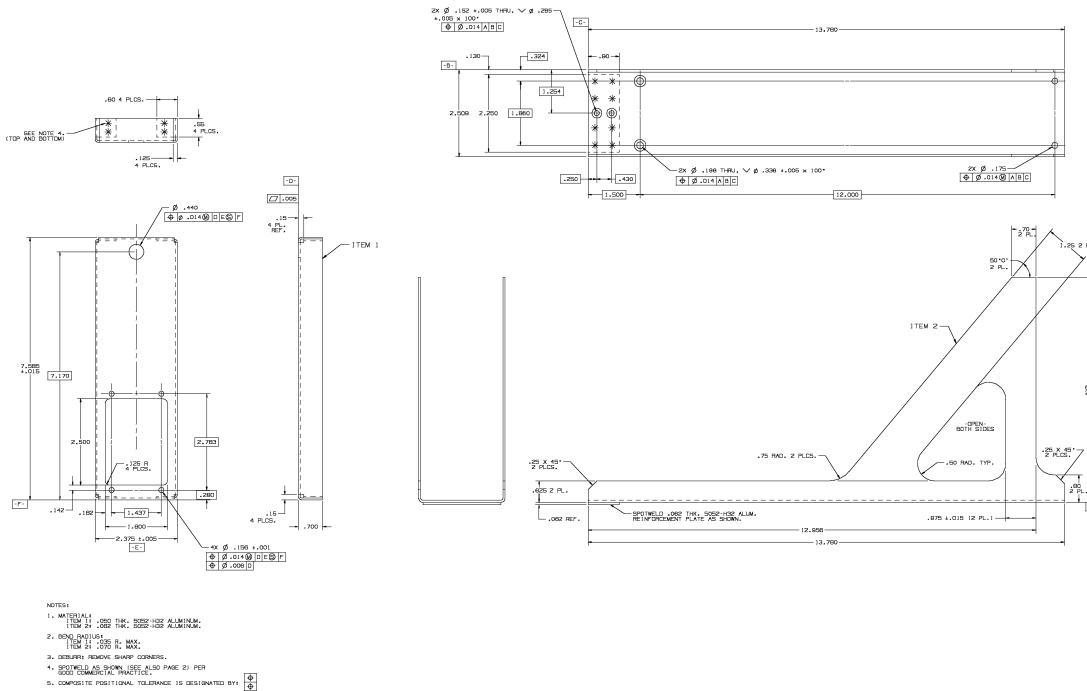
MST 67A Mode S Transponder Mounting Rack Drawing (Sheet 1 of 2) (Dwg. No. 047-09406-0010, Rev 4)
